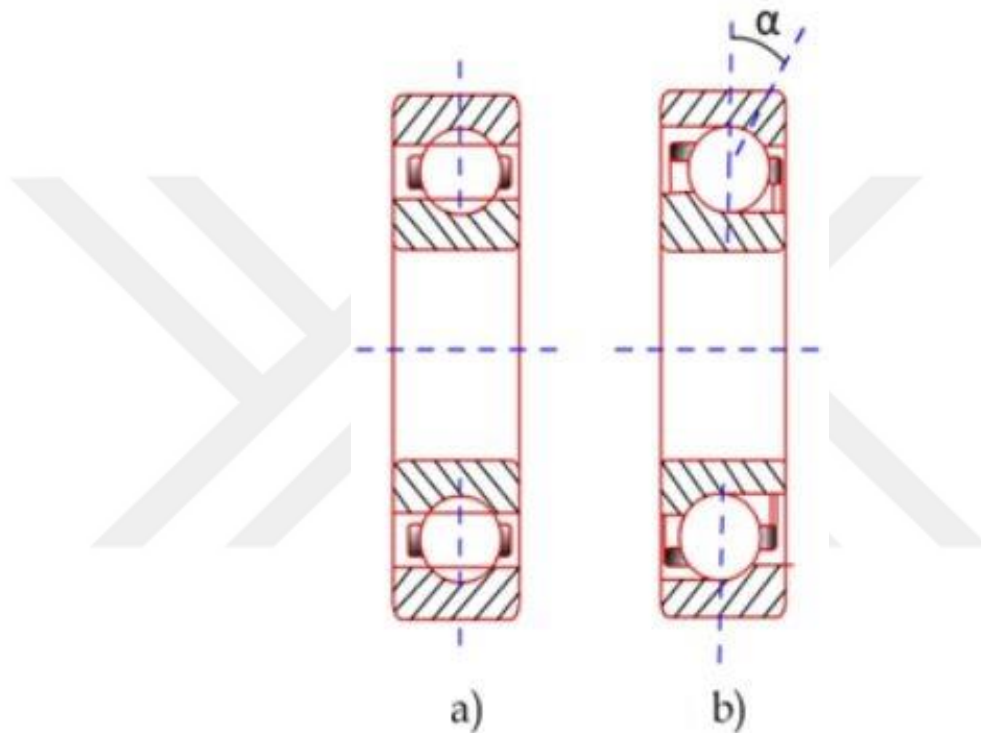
Radial bearings a) deep groove b) angular contact (NPTEL, 2019)
